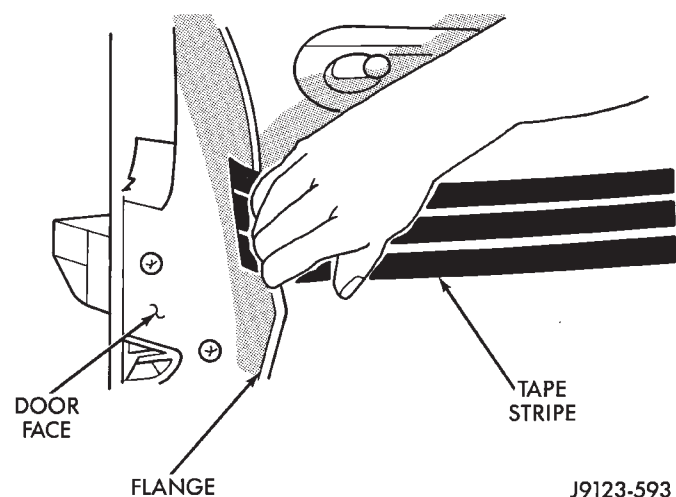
Tape Stripe/Decal Installation On Door Flange
